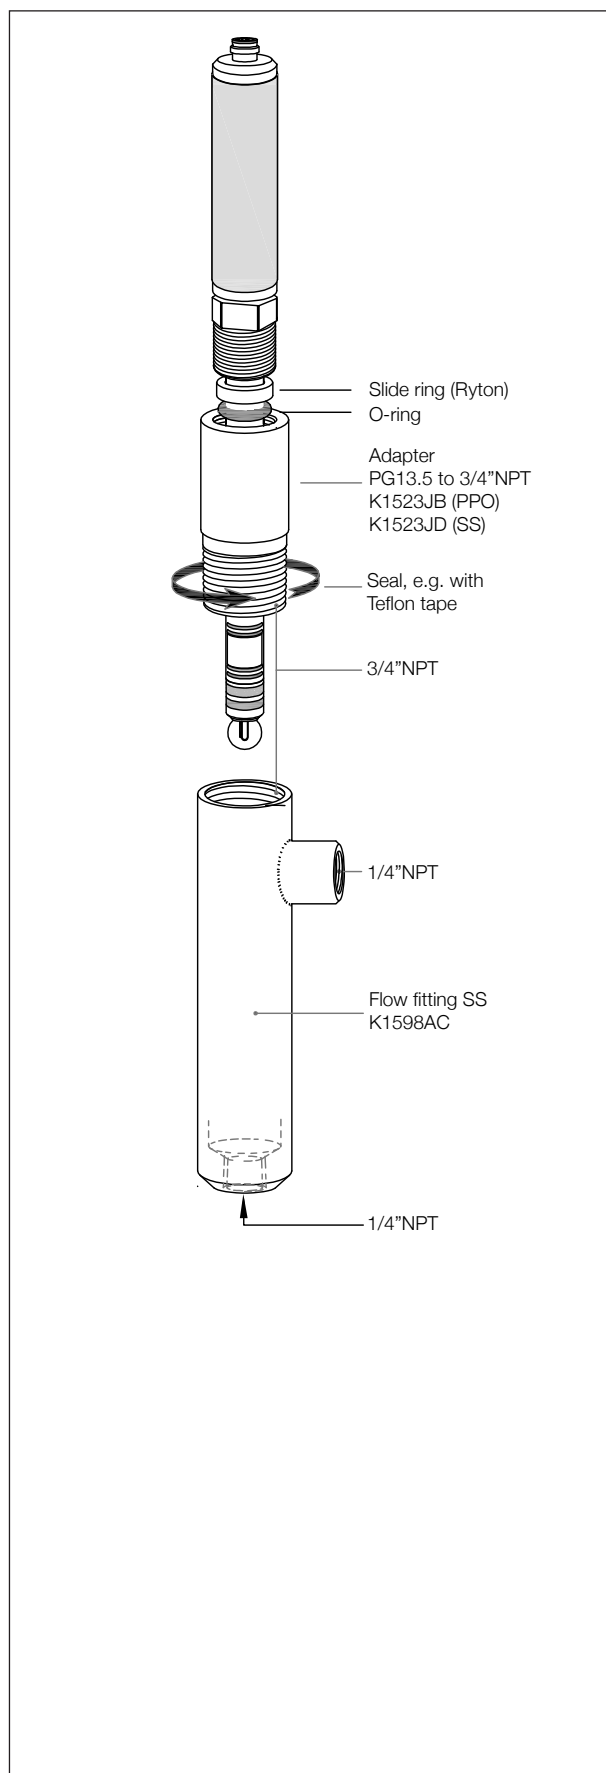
Mounting of sensor in fitting K1598AC, using adapter K1523JB / K1523JD
